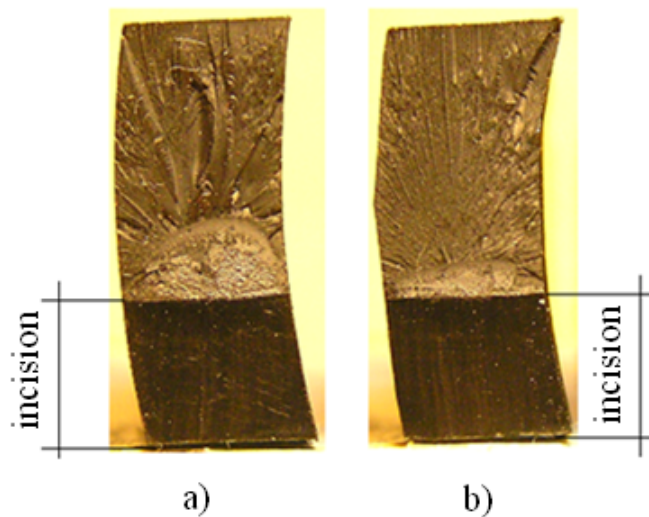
Microphotographs of the fracture surfaces of incised model specimens of PE100 WBJ in the zone of the main material (a) and in the welding zone (b)
